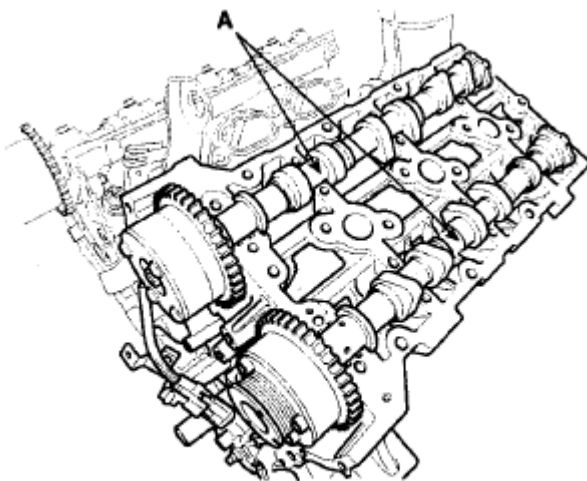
Identifying Camshaft Bearing Cap And Thrust Bearing Cap (1 Of 2)
